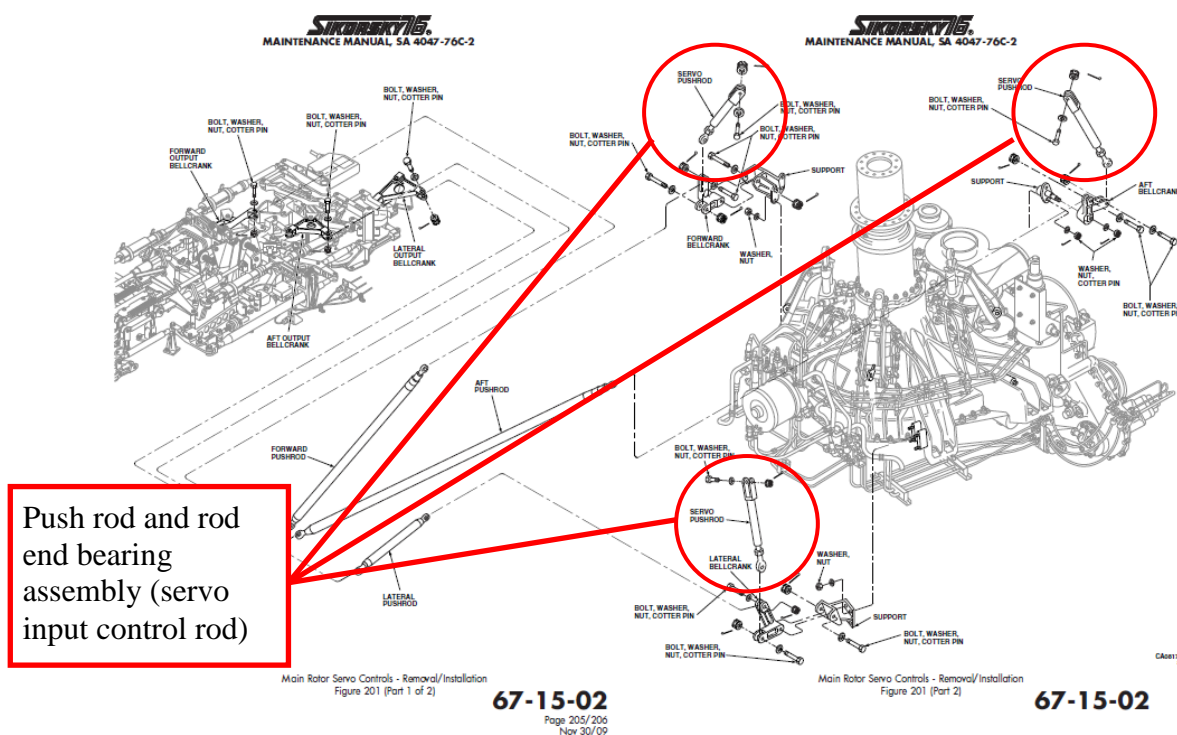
Illustration of the basic length of push rod and rod end bearing assembly
